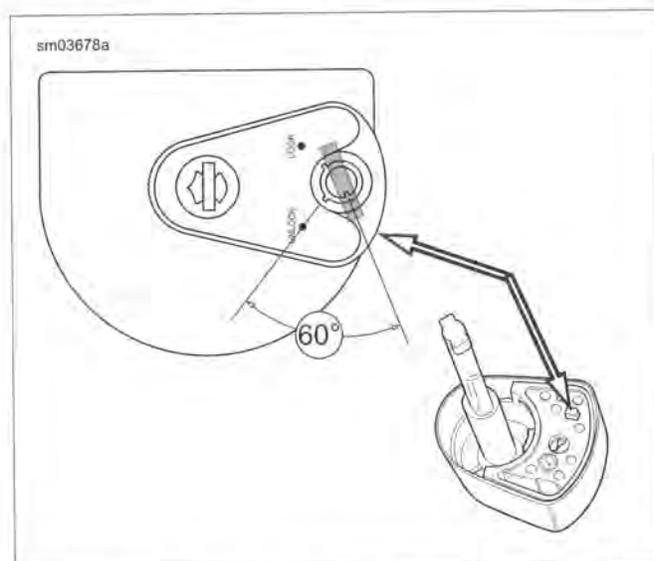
Ignition Switch Knob Release Button (Top and Bottom Views)
